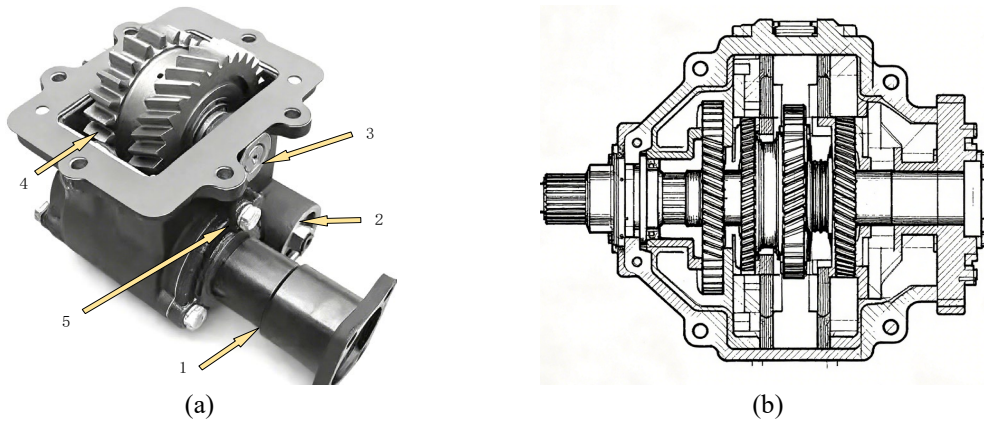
Overall Structure (a) and Cross-Sectional View (b) of the PTO (1-Generator, 2-Motor, 3-Connecting Flange, 4-Gearbox Magnetic Particle Brake, 5-Plug Screw)
